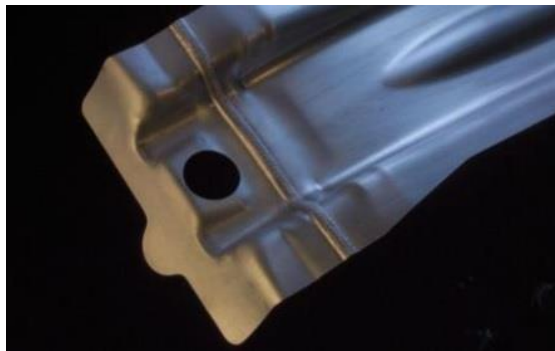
A workpiece after welded by CMT process. [29]
